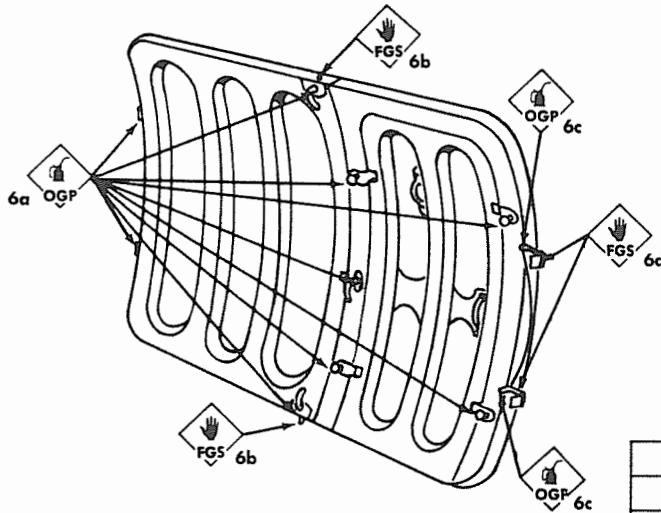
(Sheet 7 of 12 Sheets). Lubrication Chart
